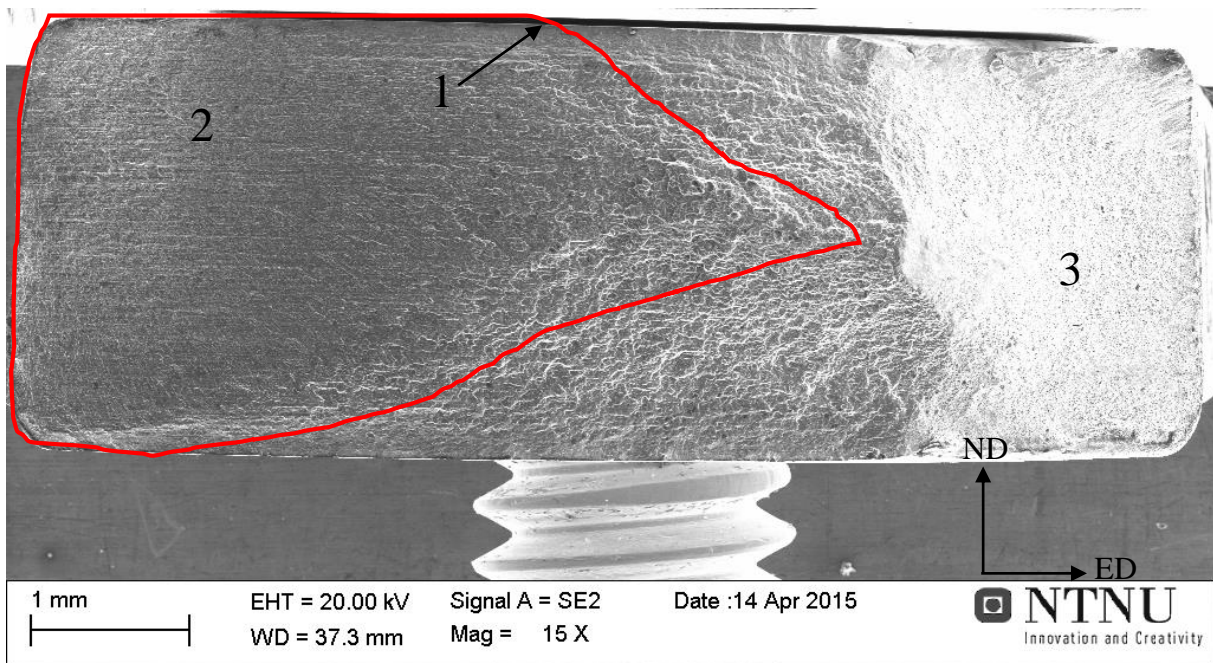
An overview of the fractured surface of AA6082 T6 with the longest fatigue life, 15X magnification. The fatigue fractured area is enclosed by the red line.
